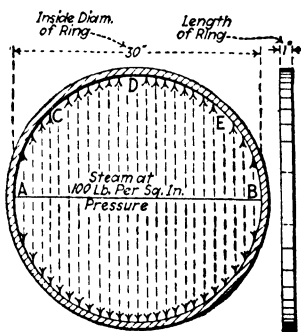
Illustrating direction of pressure acting to separate ring of shell plate on horizontal diameter.
